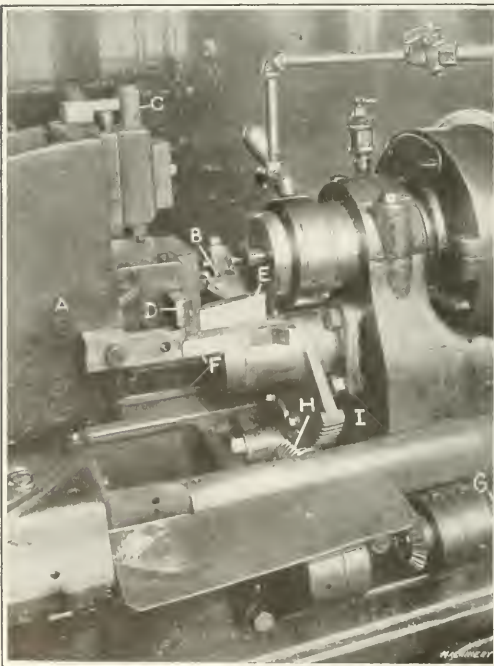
Partial Rear View of Machine showing Special Feed Mechanism for Facing Tool and Means of controlling Forming Tools
